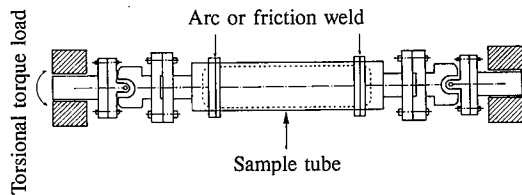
Torsion fatigue test method for propeller shaft tubes, including welded joints
